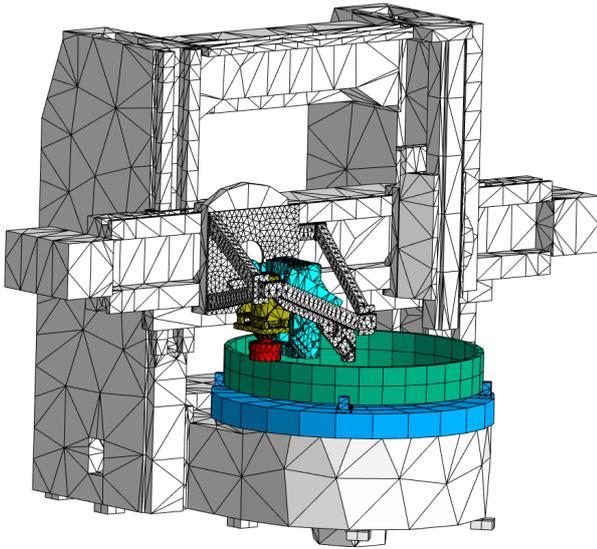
Assembled test rig components inside MORE. The components are indicated as grey: machine support, red: spindle rotor, yellow: spindle stator, cyan: spindle support, blue: turn table and green: work piece.
